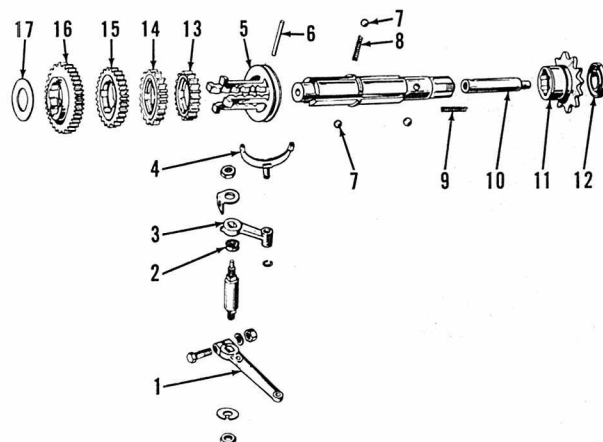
Exploded view of the four speed transmission output shaft and gears.
